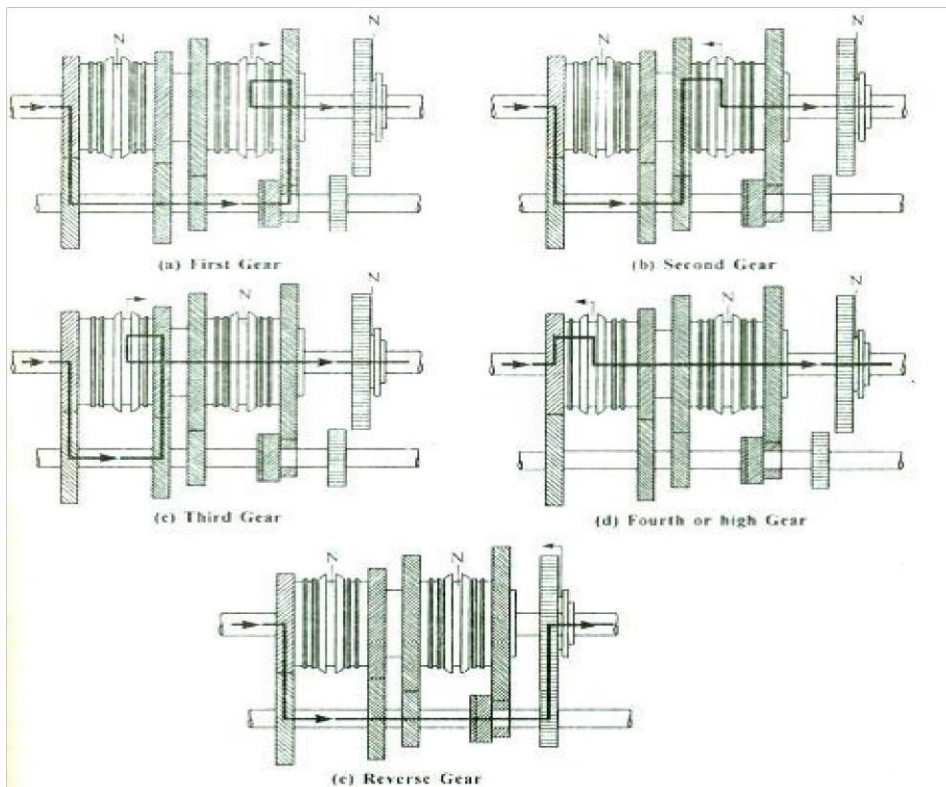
Gear drive positions in a typical 4 speed transmission with all forward gears synchronized
